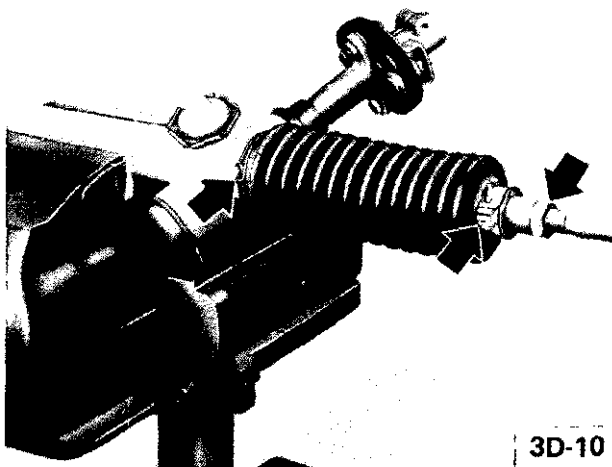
D-10 Removing Tie Rod Ends from Axial Joint
